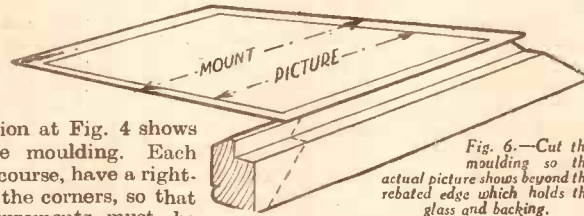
Cut the moulding so the actual picture shows beyond the rebated edge which holds the glass and backing.
